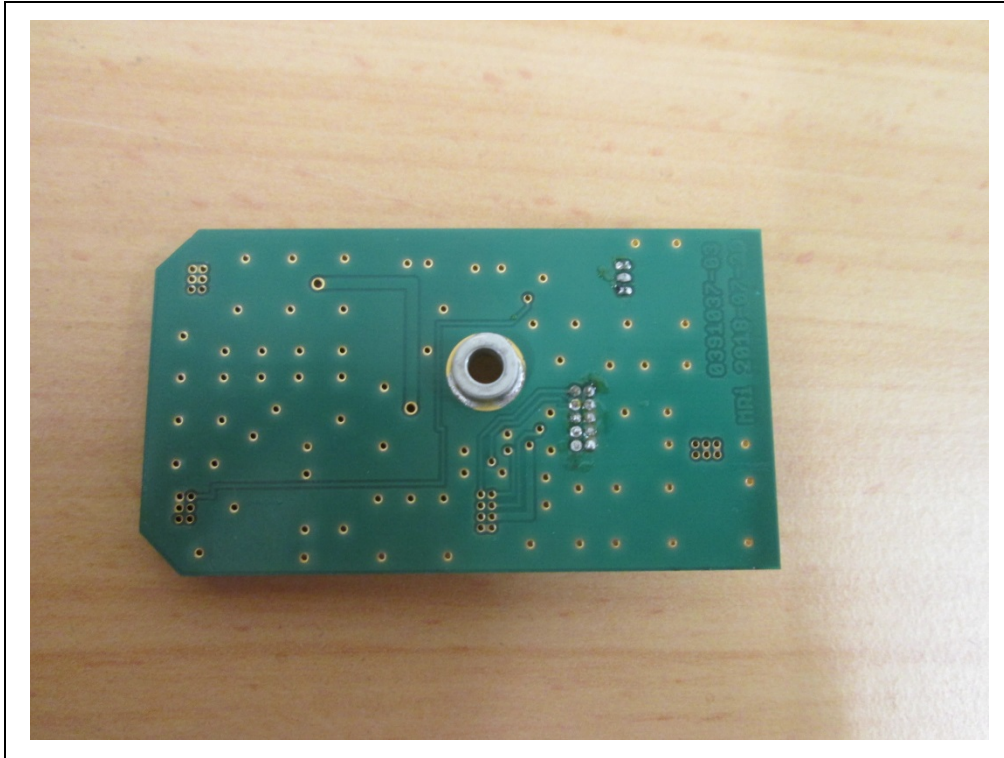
EUT, view of PCB 1 side 2 with connected sensor
